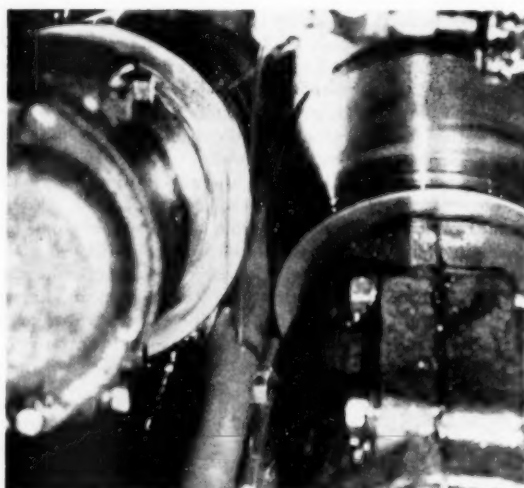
CLOSE-UP OF BAR PASSING THROUGH A MEDART STRAIGHTENER
